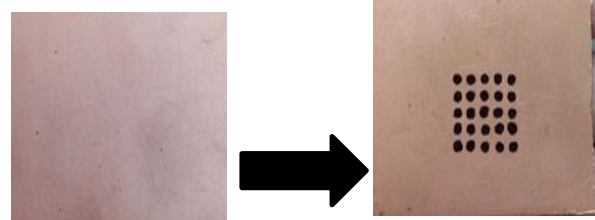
Copper clad board and etch resistant marking for the required sensor array.
